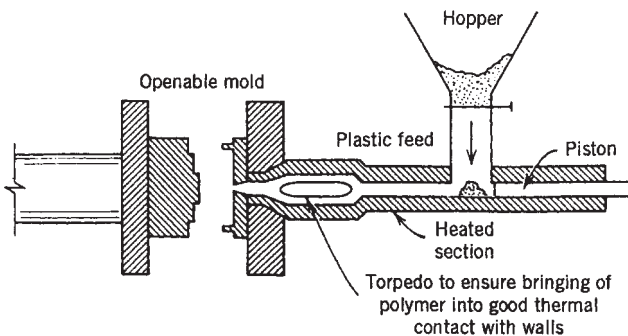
Diagrammatic representation of an injection molding machine.
